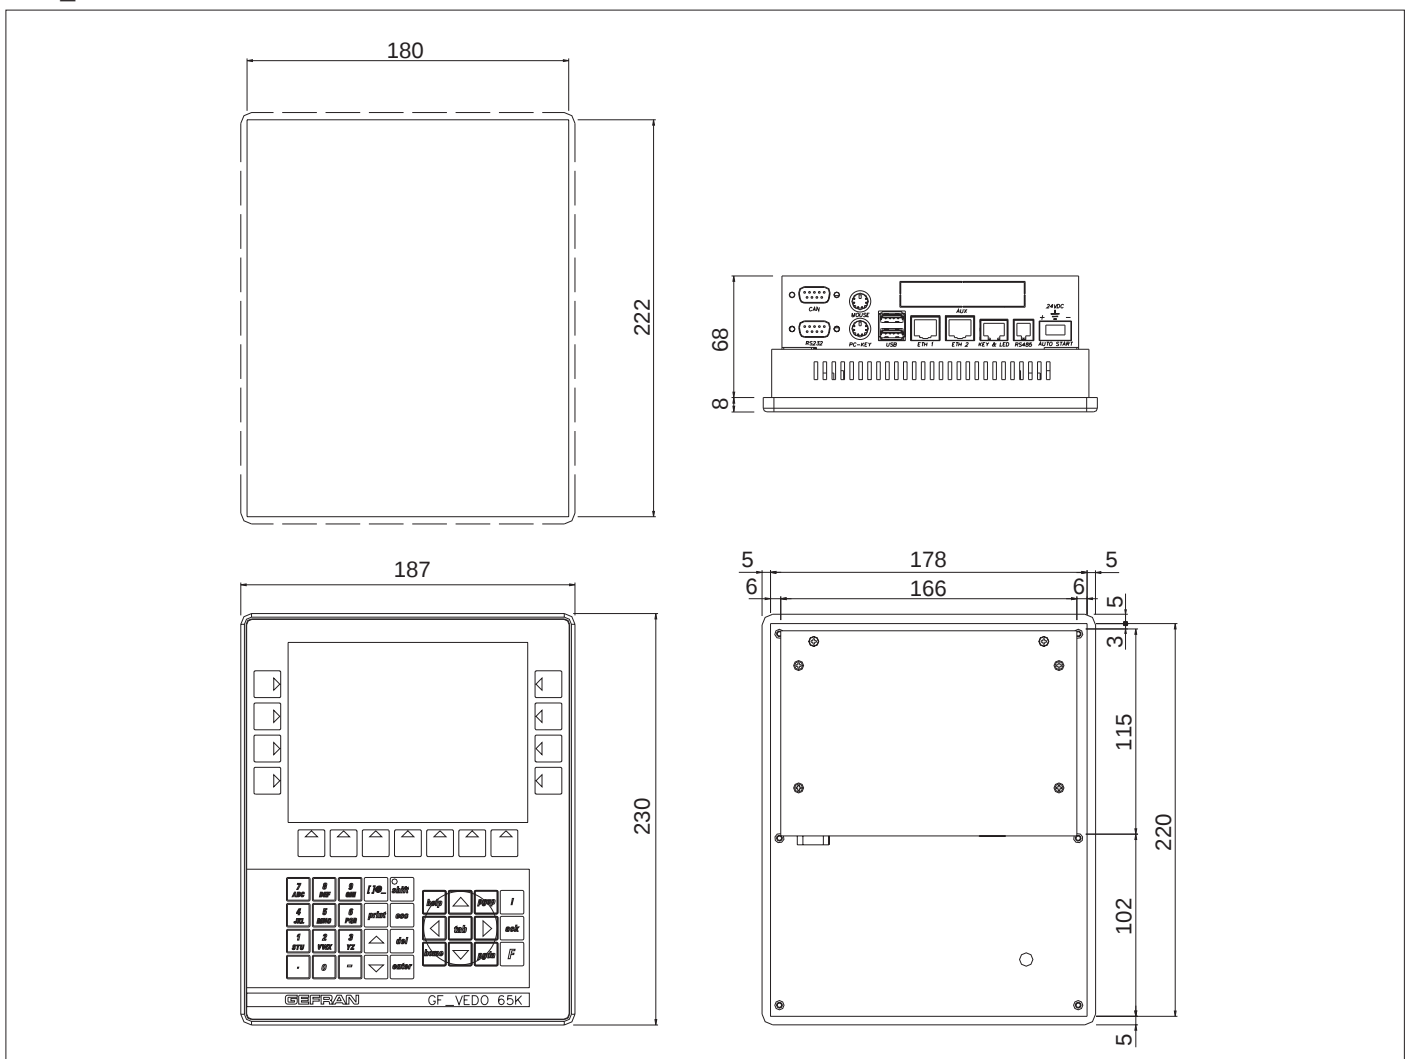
Dimensions and cut-out GF_VEDO 65CK
